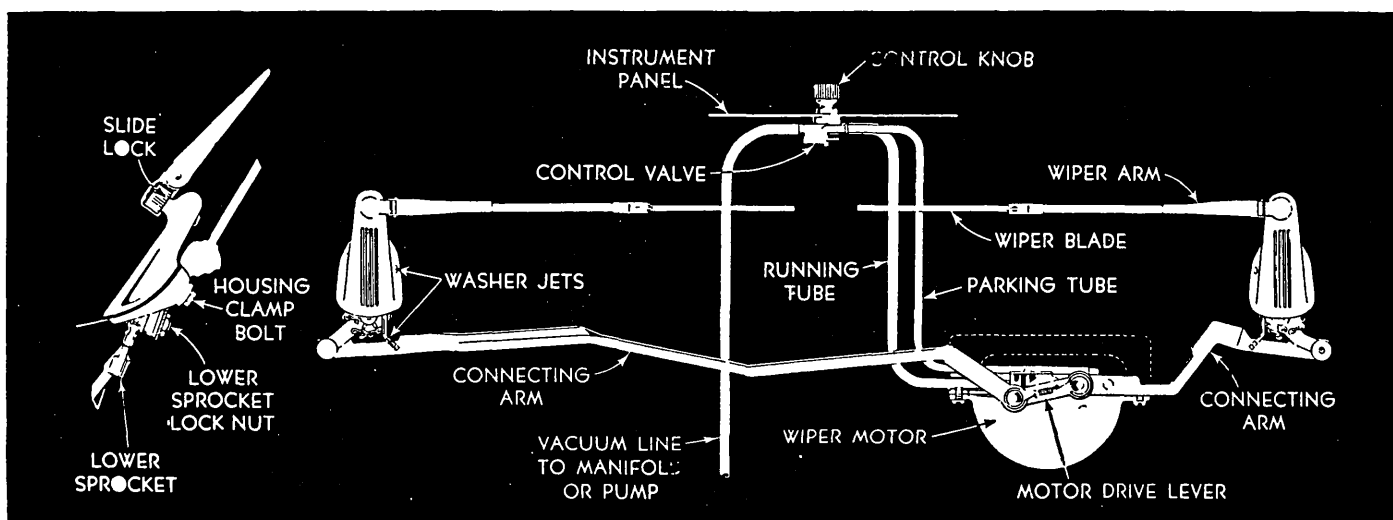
Trico vacuum wiper operated with remote control valve. Side view of housing shown at 1 ft
